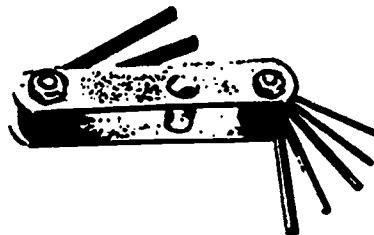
Used for tightening positive sized hex head bolts. (Vaco Products Company)
